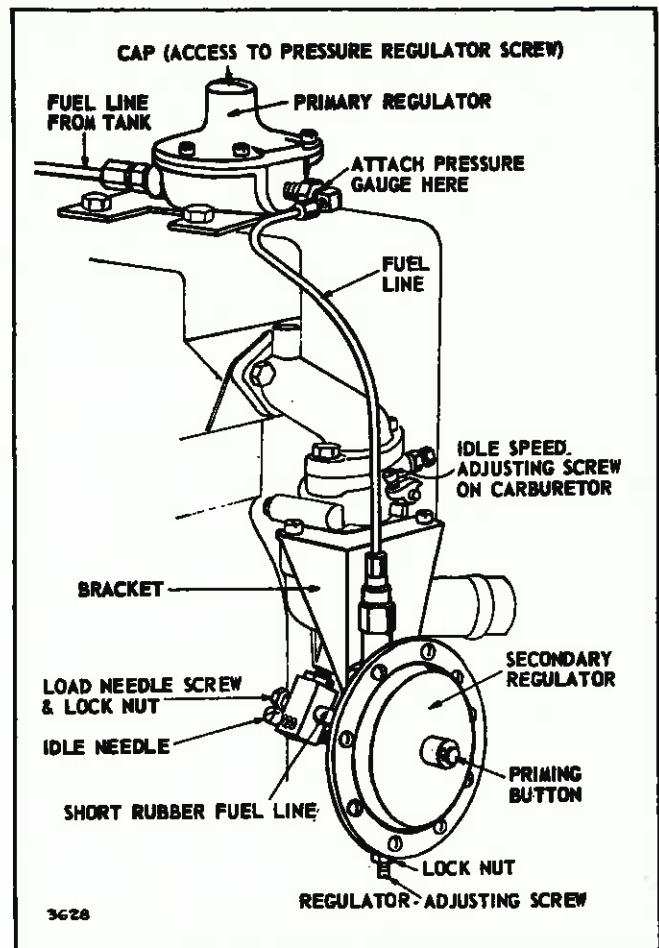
Adjusting Carburetor, L.P. Fuel System
